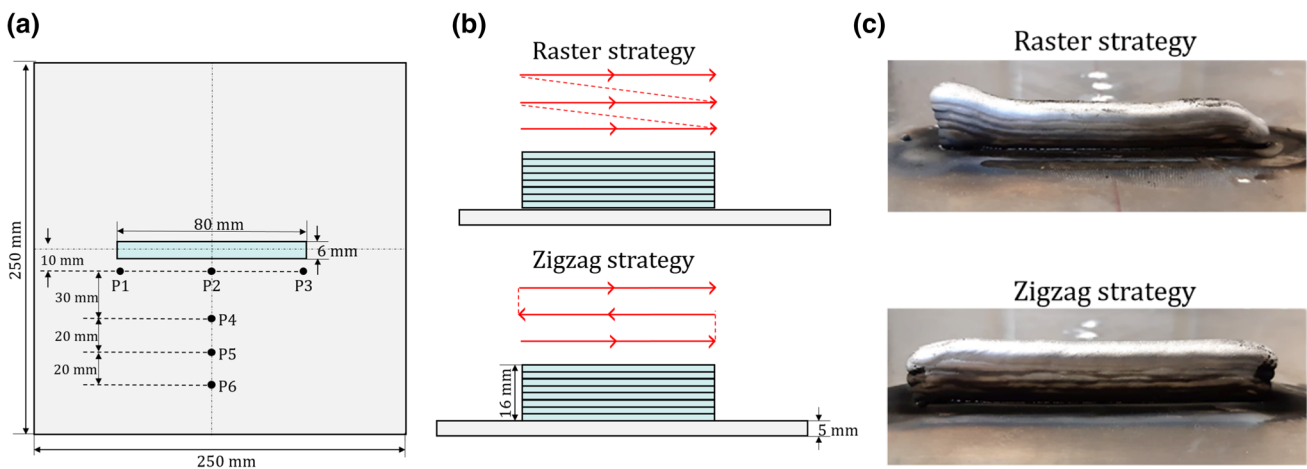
Experimental design: xy view (a); xz view, raster and zigzag strategies (b); produced parts (c)
